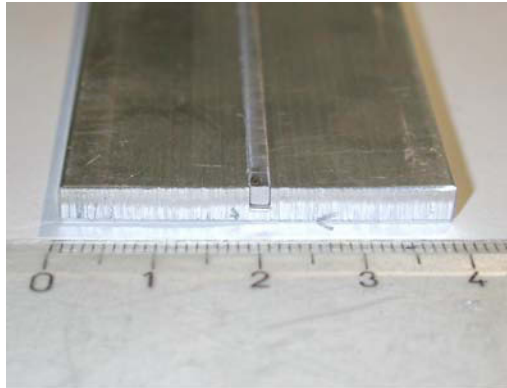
Insert placed into groove of 6060-T6 coupon before pre-weld.
